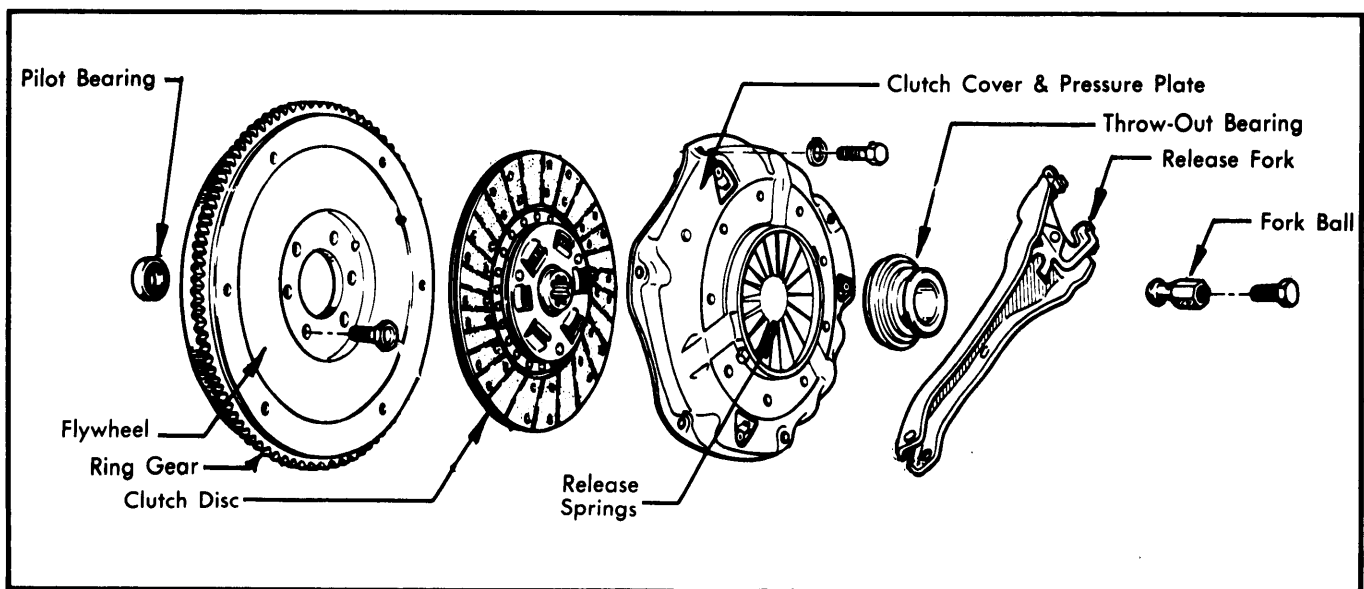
Exploded View of Diaphragm Spring Clutch Assembly
